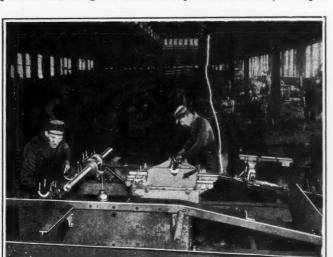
Scraping Bearings for 75- and 120-horsepower Tractors
